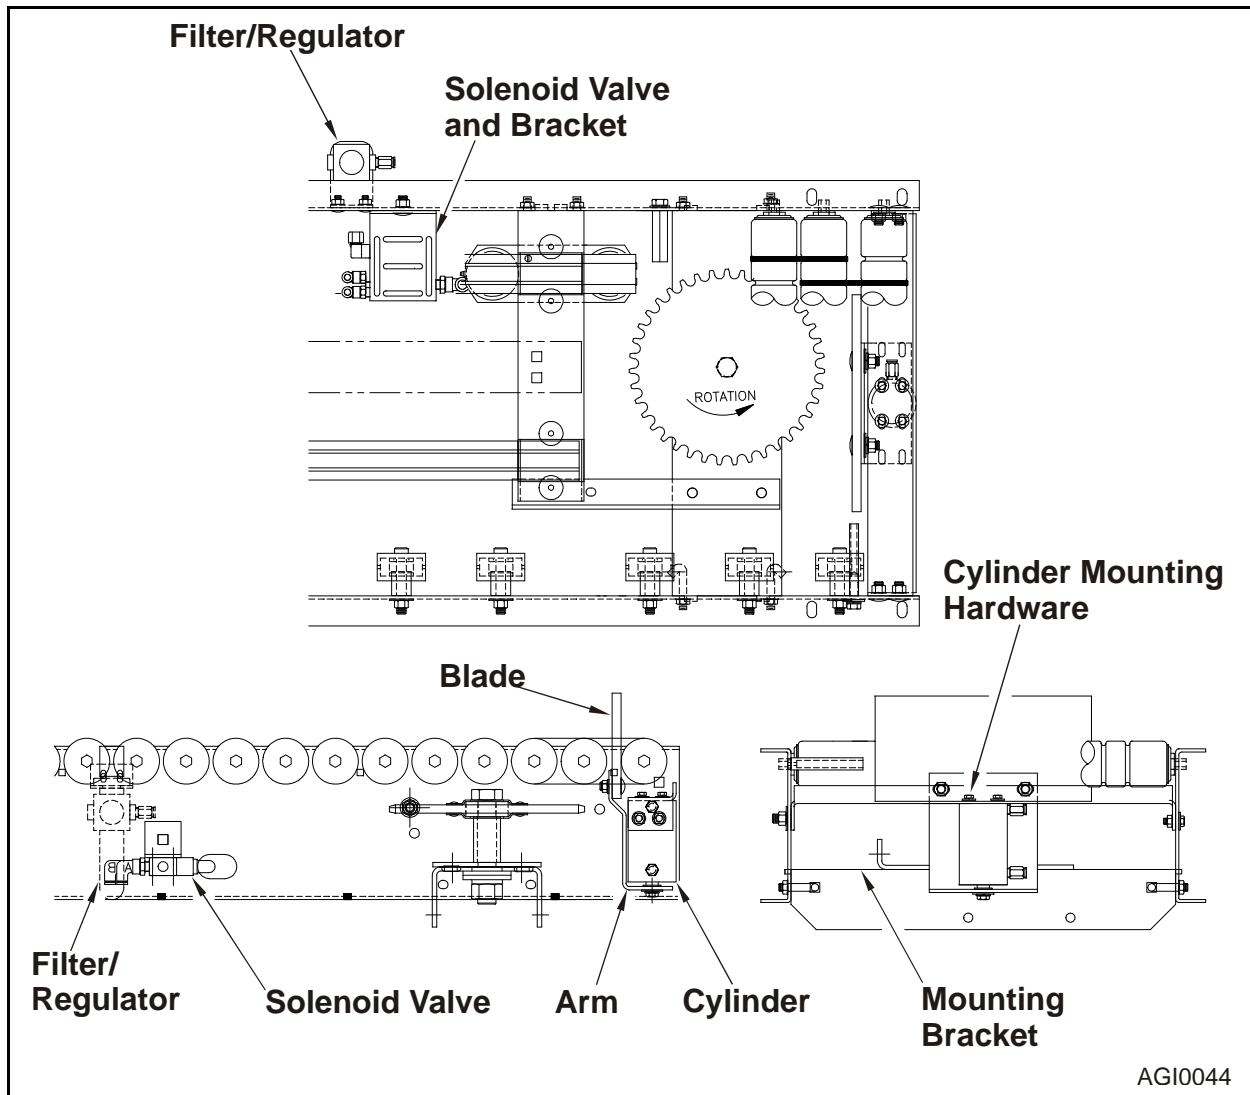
14 Blade-Stop (Discharge Idler Section)
